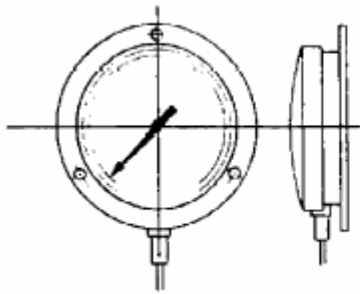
SURFACE MOUNTING WITH BOTTOM CAPILLARY ENTRY
